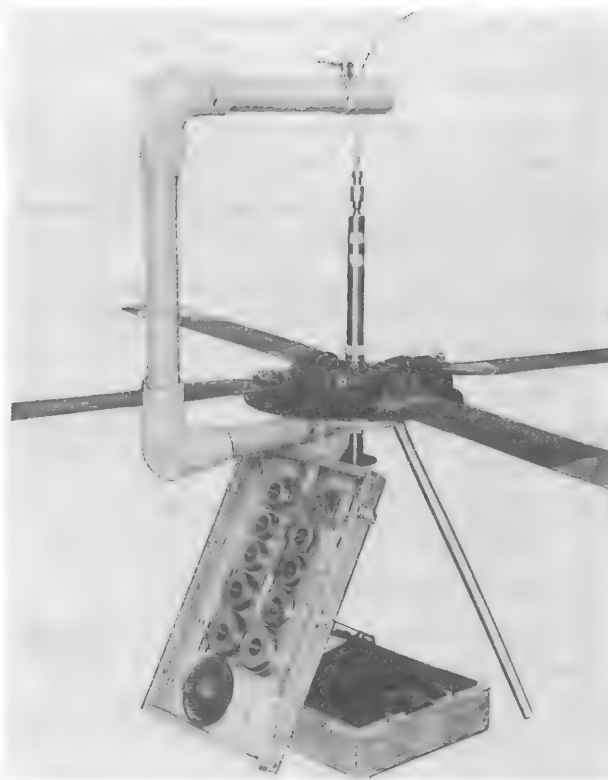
Balancing Tail Rotor Assembly with Marvel Balancing Kit
